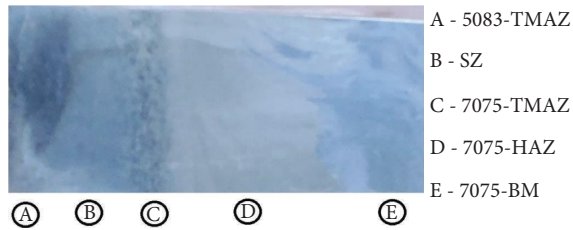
Macrostructures of the weld joint fabricated at 1100 rpm.
